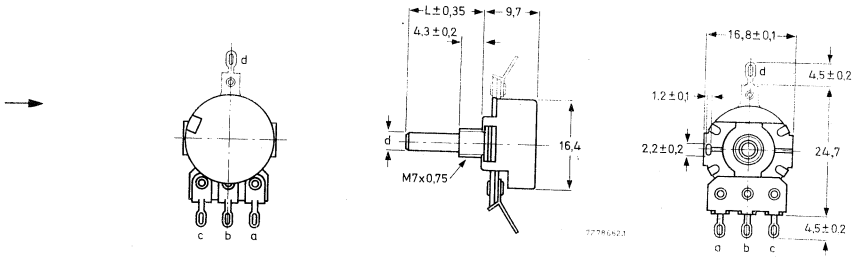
Single potentiometer with mounting bushing. For dimensions d and L, see Spindles.
